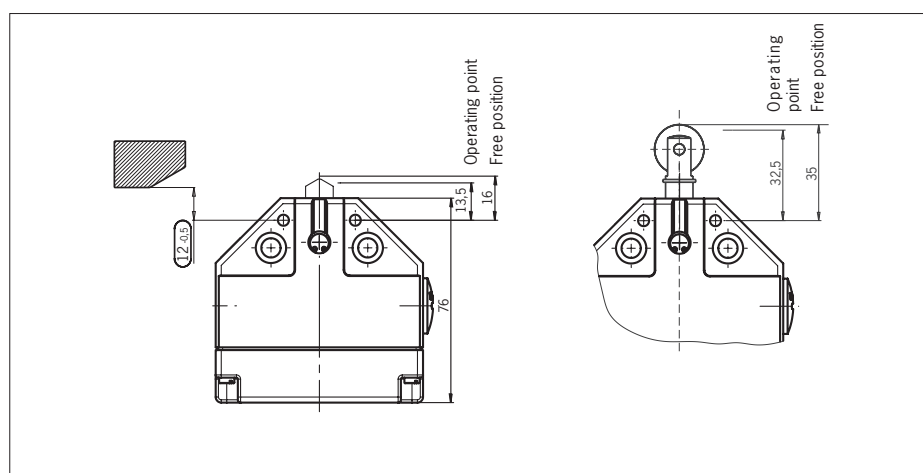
Dimension drawing N1A.2588 (2 x ES588)
